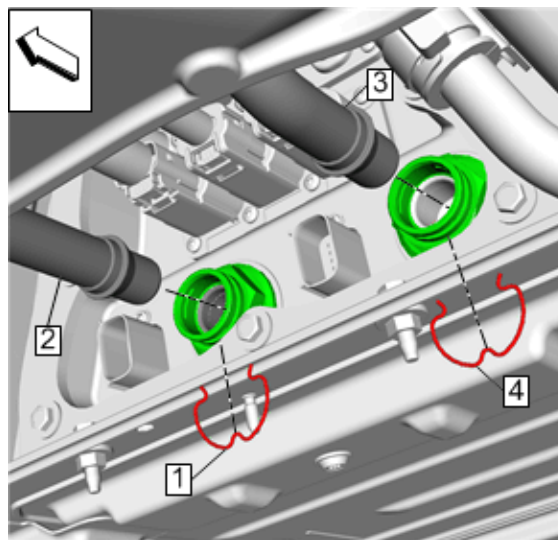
Drive Motor Battery Coolant Cooler Inlet Hose, Outlet Hose And Retainers
